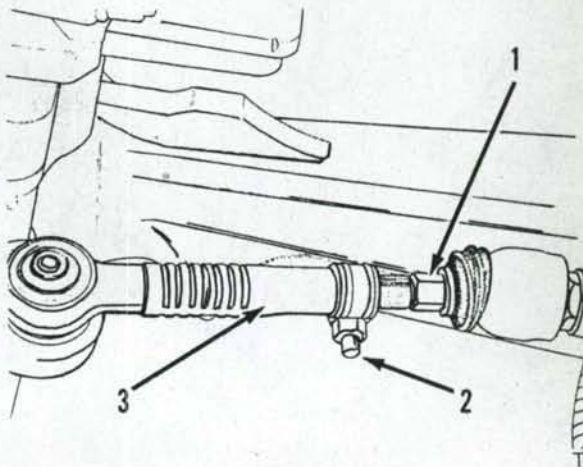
View of toe-in adjustment points for four-wheel-drive models. Be sure to adjust both sides equally.
